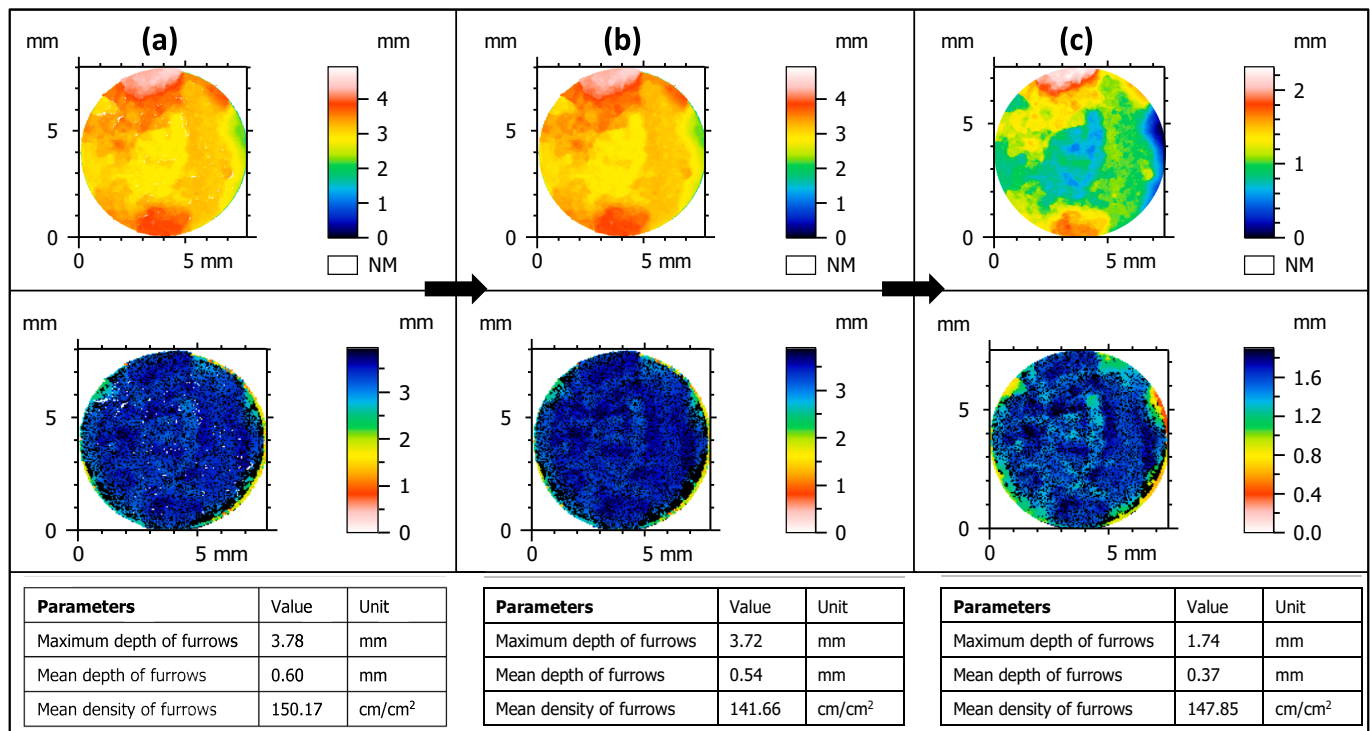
Entire fracture surface methodology processing: (a) original fracture surface; (b) the NMP filling surface, and (c) extracted fracture surface.
